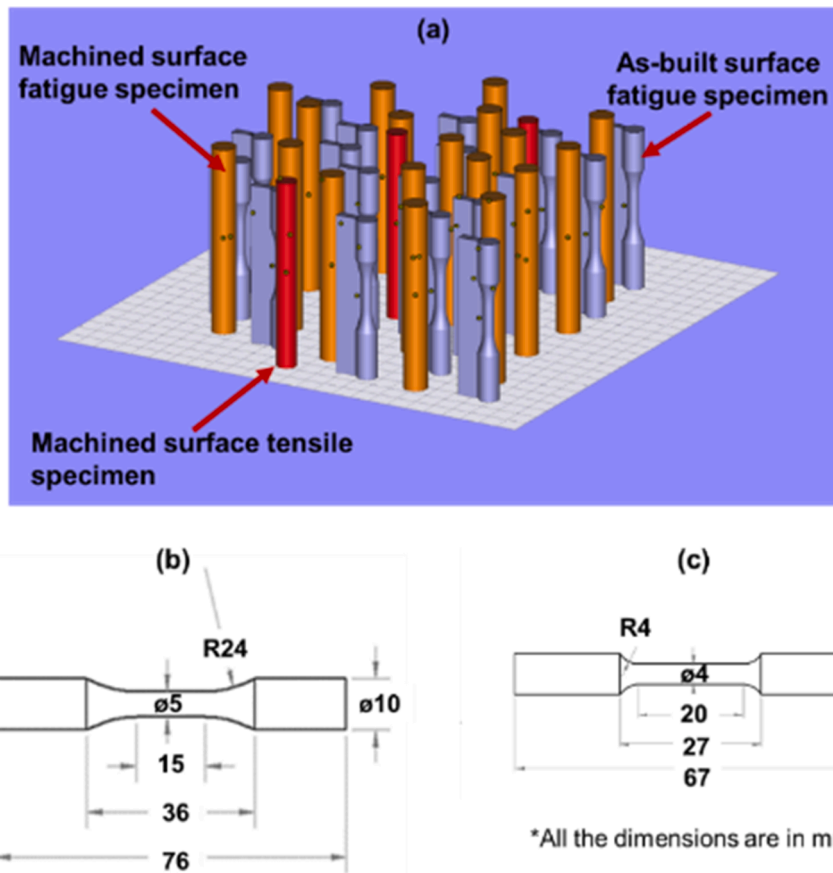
(a) The print layout, showing different types of specimens fabricated, including fatigue specimens in as-built surface condition, cylindrical rods to be further machined to fatigue and tensile specimens, (b) final geometry of fatigue specimens following the ASTM E606 [34], and (c) final geometry of tensile specimens based on ASTM E08 [35].
